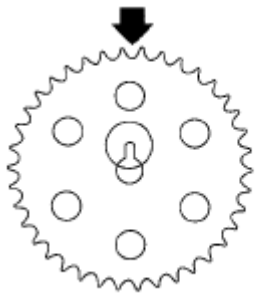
Identifying "Top Mark" On Crank Sprocket
